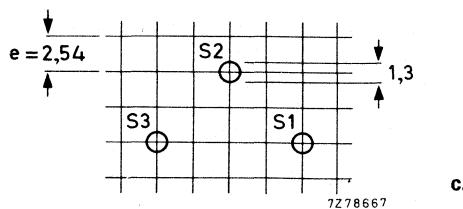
Test switch for horizontal mounting with adjustment knob at the side of the base plate.
